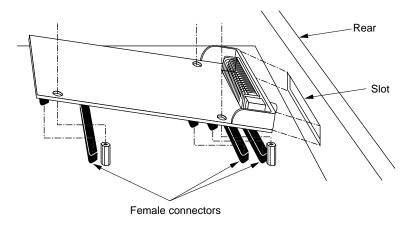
Positioning the Adapter Board Over the Graphics Board
